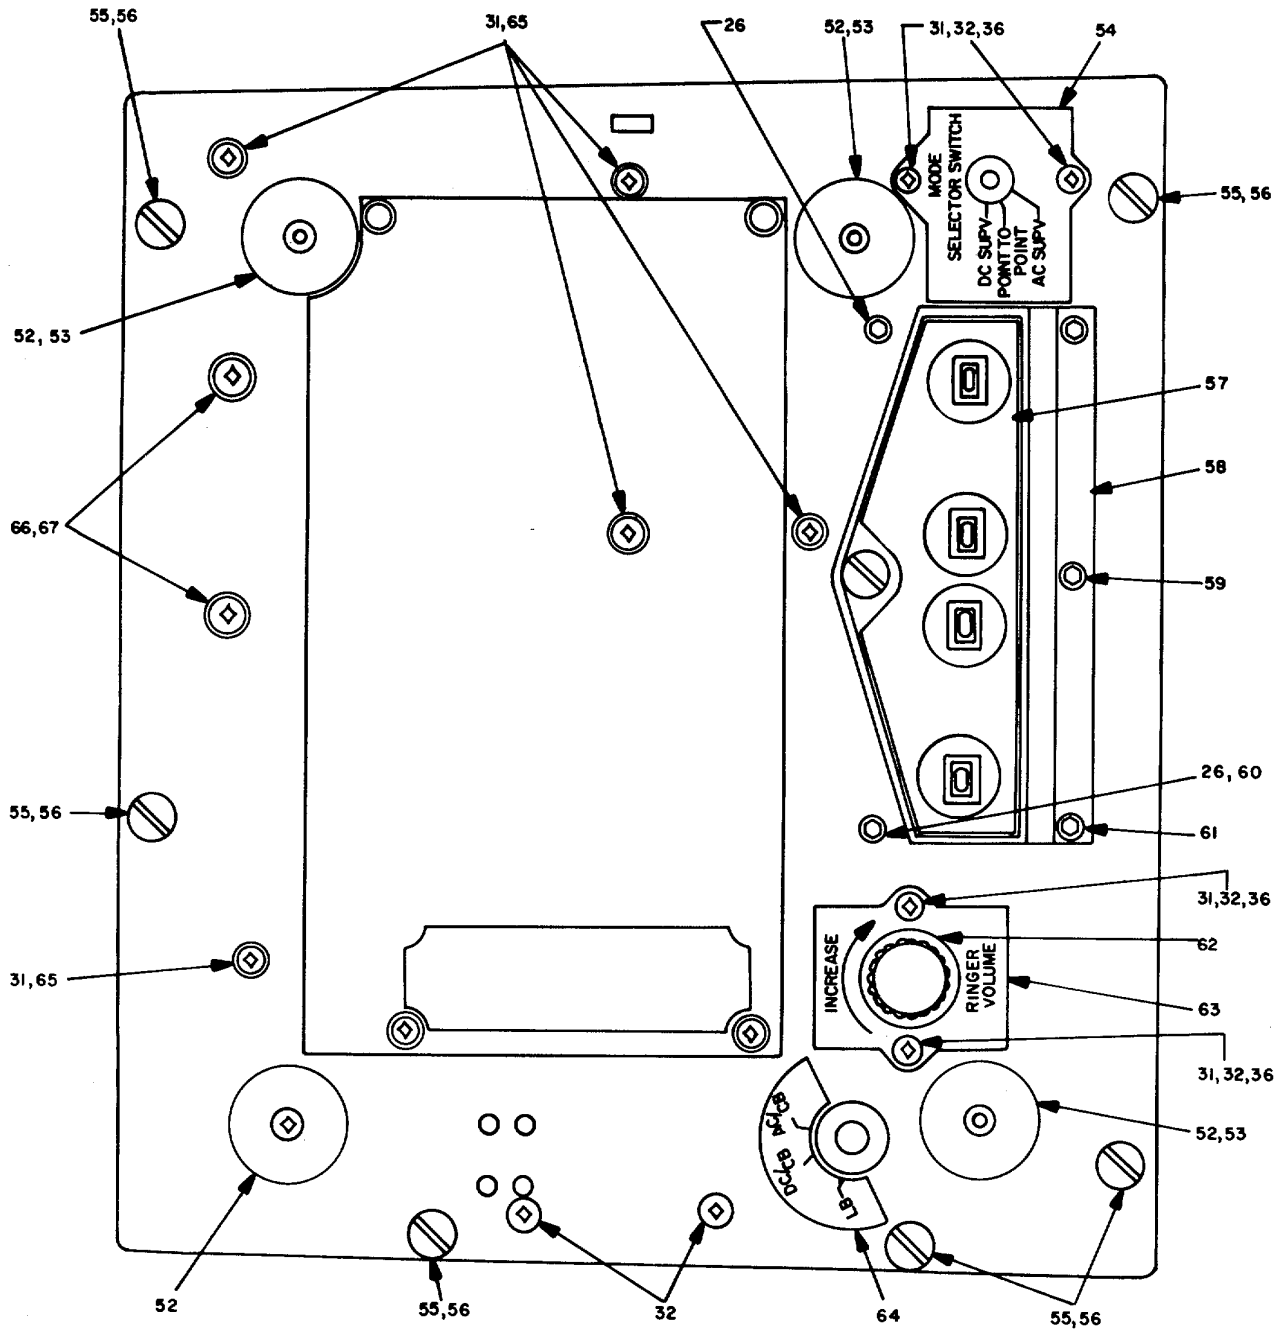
Base Plate Assembly (Sheet 4 of 4)
